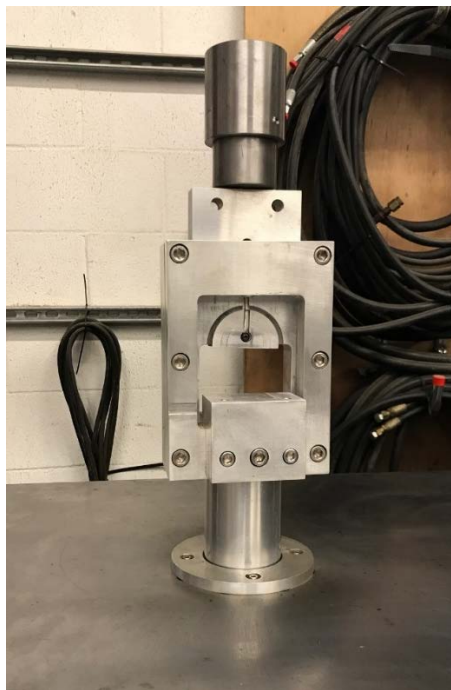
Shearing tool for bond line testing per ASTM D905.
